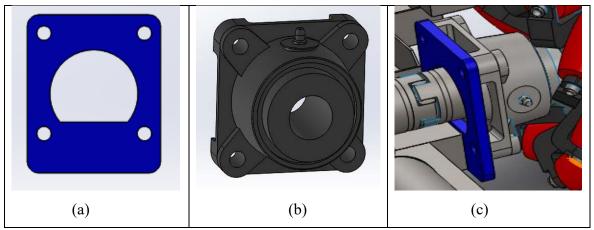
(a) 3D- model of a bearing connecter (b) 3d-model of a Timken bearing (c) Assembly of bearing connector with Timken bearing.
